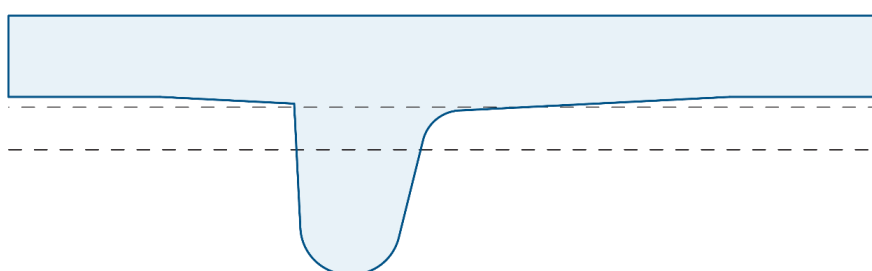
Planner used to cut the back groove of the HC crossing
